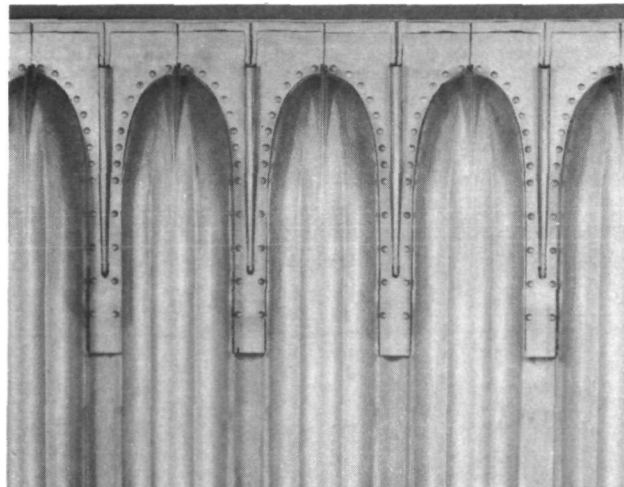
END CLOSURE WITH EXTERNAL DOUBLERS AND RIVETS
